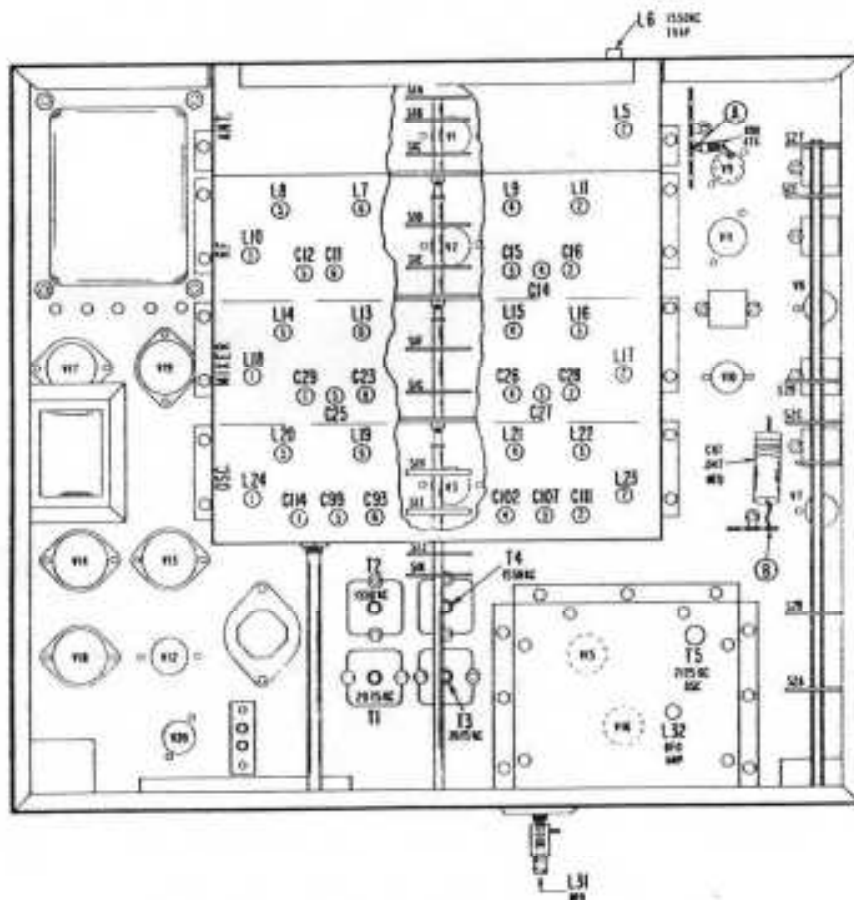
Bottom View of Chassis Showing Location of Alignment Adjustments and Tubes
